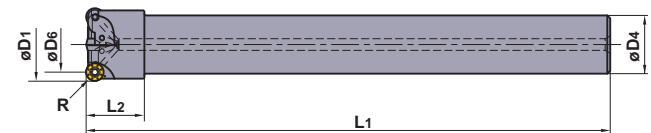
(Type without the centre cutting edge (multi-tooth))
